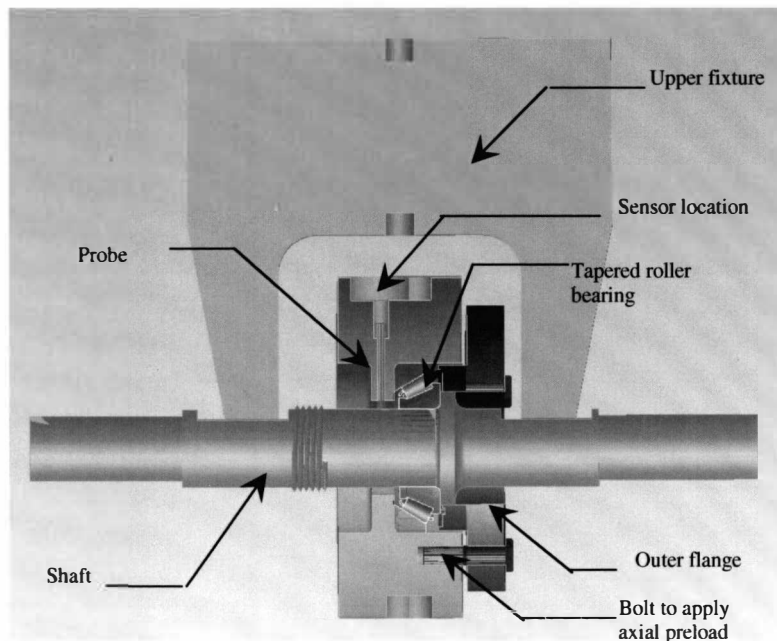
Cross-section of the radial test fixture to test a single bearing
